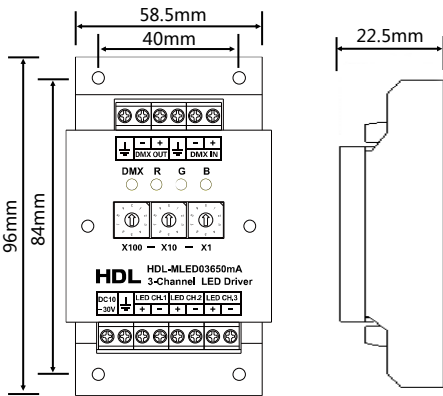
Dimensions - Front View Figure 3. Dimensions - Side View
